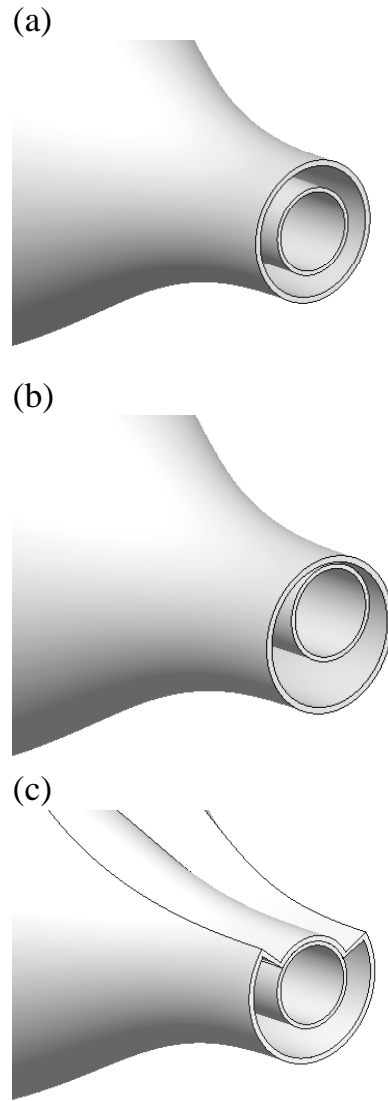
Exhaust geometry of (a) coaxial; (b) eccentric; and (c) arcuate nozzles.
